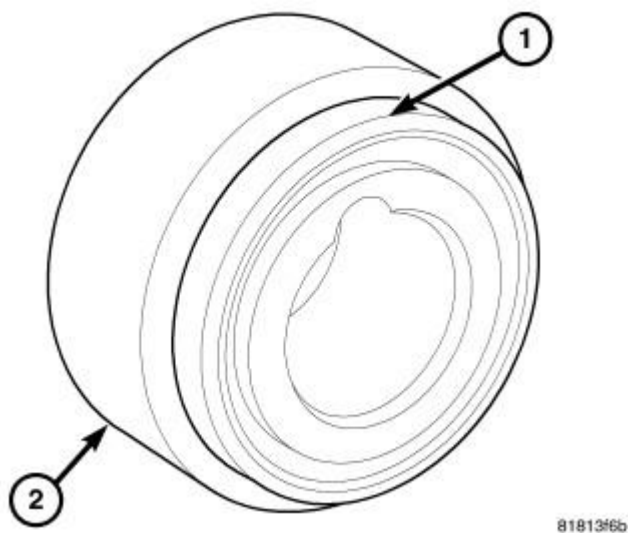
Crankshaft Oil Seal & Seal Installer 9506
